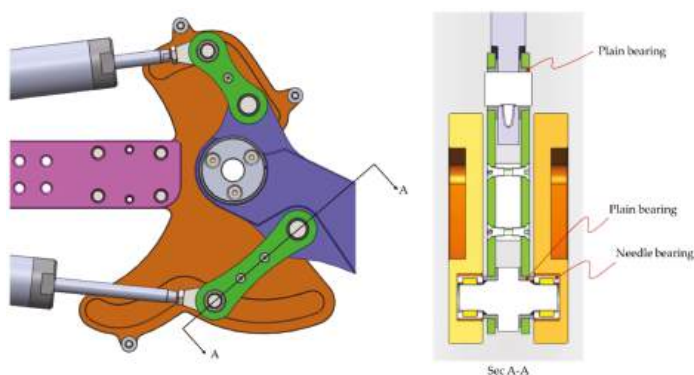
Illustration of the bearings (plain bearings from Igus and needle bearings) used in the design.
